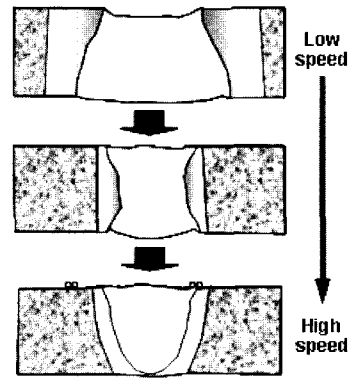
Schematics diagram of the bead with the welding speed
